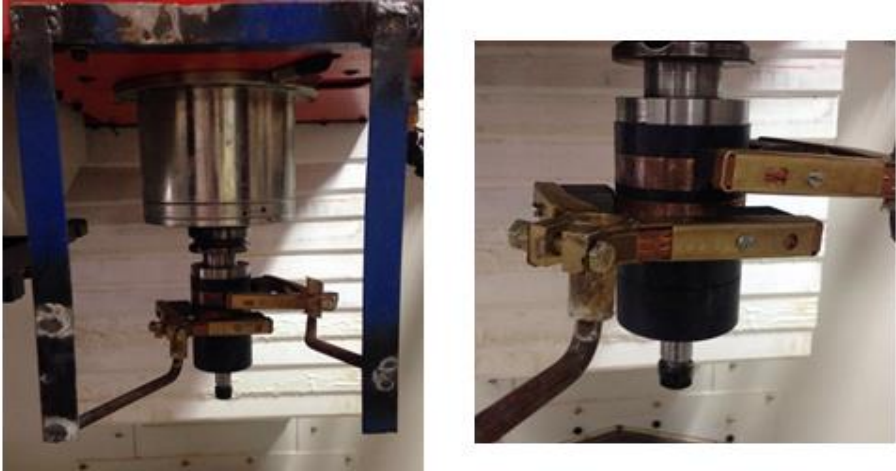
Ultrasonic-assisted drilling setup fixed on CNC machine with power supply arrangement
